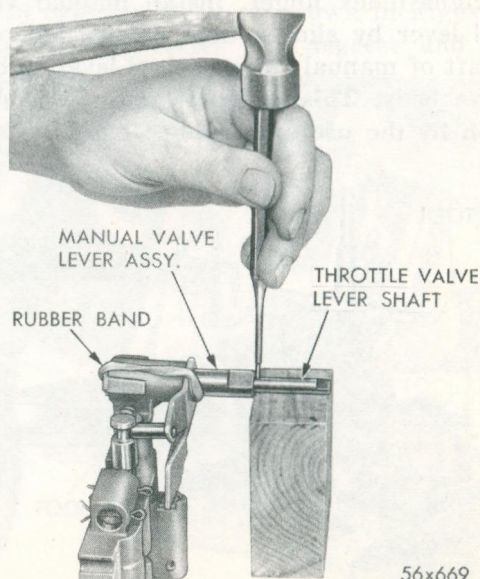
Removal and Installation of Throttle Valve Lever Shaft Pin (Typical View)
